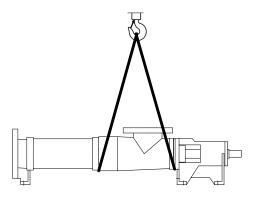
Fastening the lifting gear to the pump (as illustrated)
